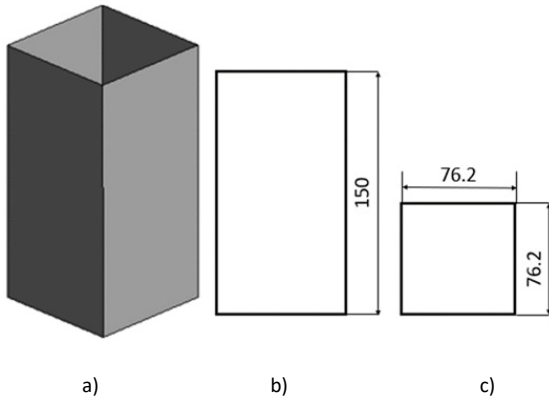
Square Tube geometry (a) isometric, (b) front, and (c) top view (unit in mm)
